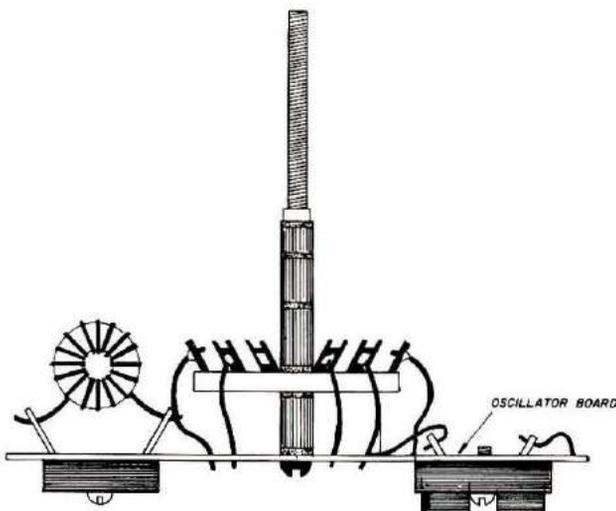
This is the way the switch and PC boards are assembled. Note that only one piece of sheet metal is required — the mounting bracket.
